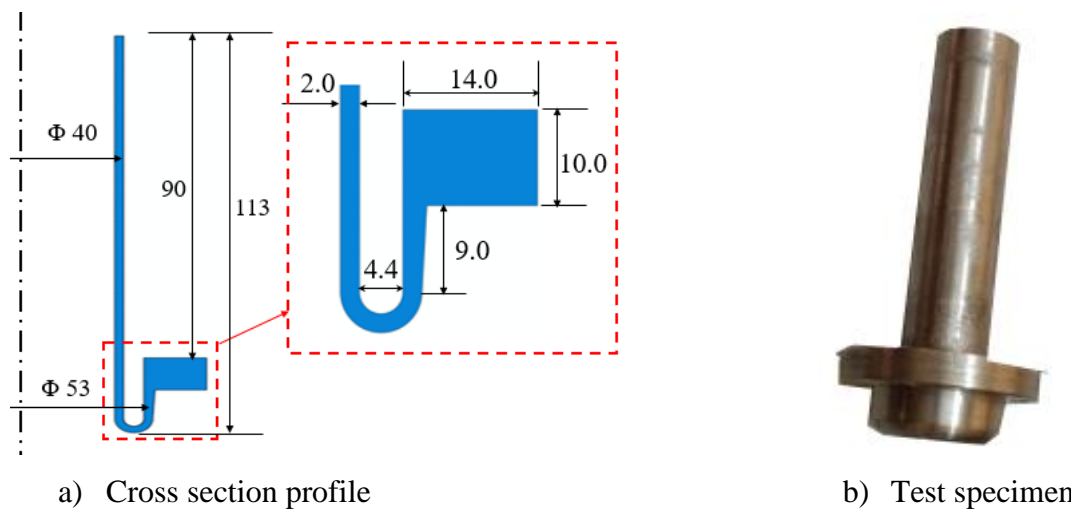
Inversion tube geometry and test specimen of Variant -1 (dimensions in mm)
